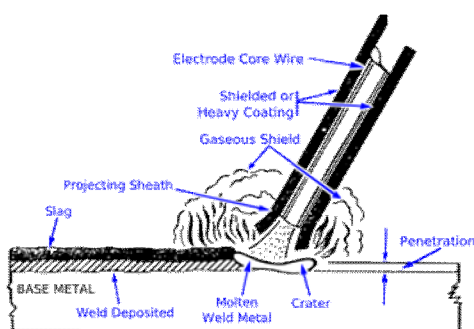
Shielded Metal Arc Welding Diagram
